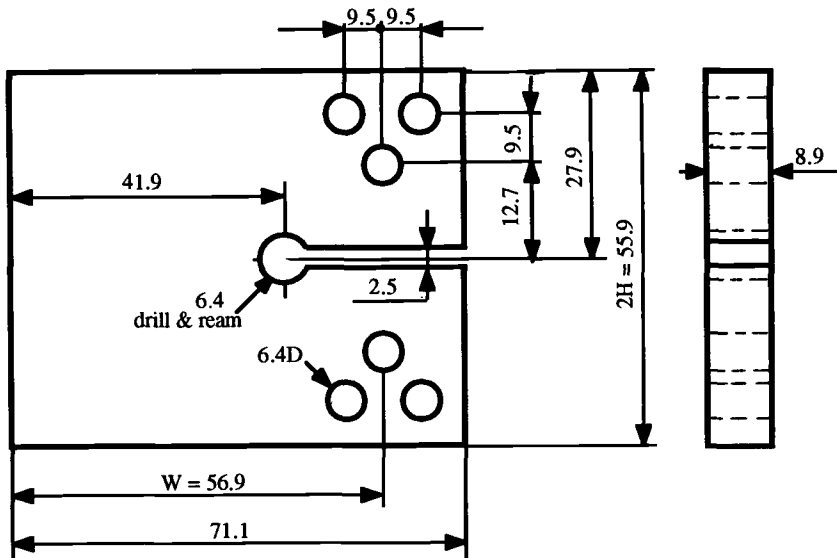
Keyhole-type specimen (all dimensions in millimetres).
